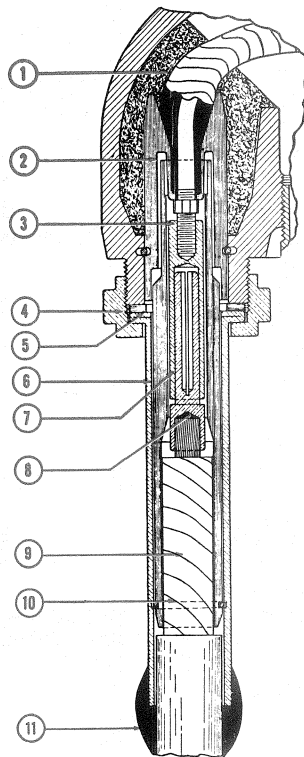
Cut-away drawing of separable-sleeve bushing of subway-type cutouts—5200 volts, 100 and 200 amperes.
